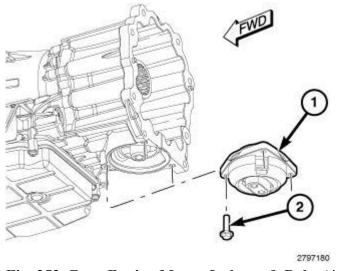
Rear Engine Mount Isolator & Bolts (4x4) Courtesy of CHRYSLER GROUP, LLC
